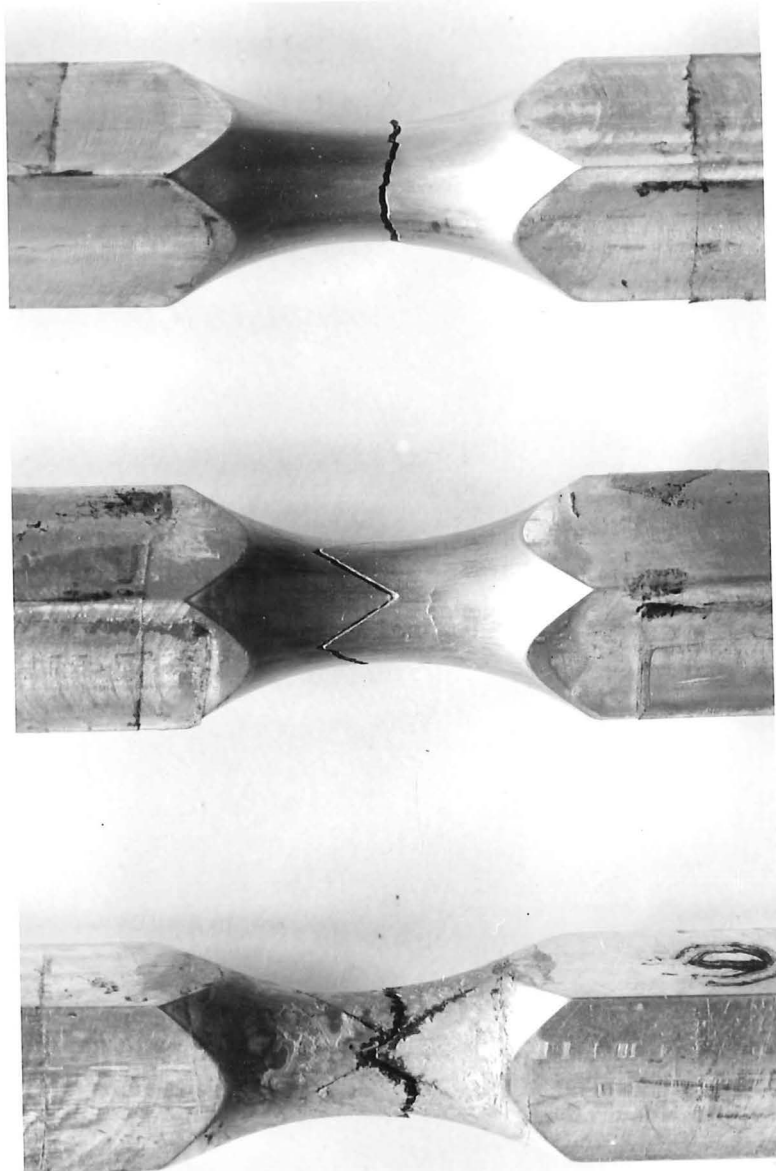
/26: Reverse bend fatigue fractures.
